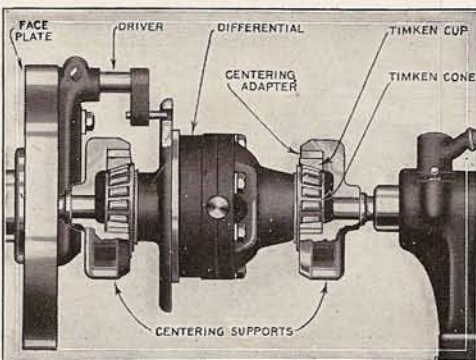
Centering Supports Hold and Center the Differential Case for Machining and Testing.
